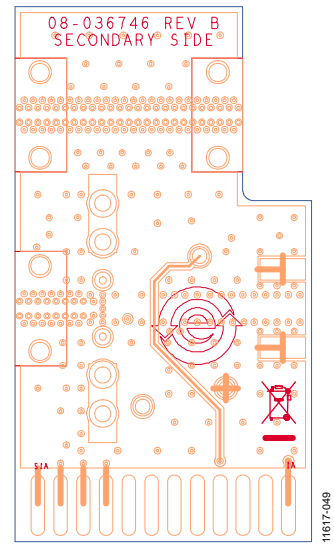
ADL6010 Evaluation Board Layout, Bottom Side
